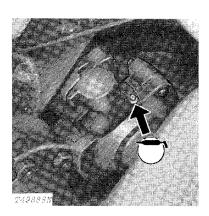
Engine-to-Transmission Universal Joint (Transmission End) (1 Point)
